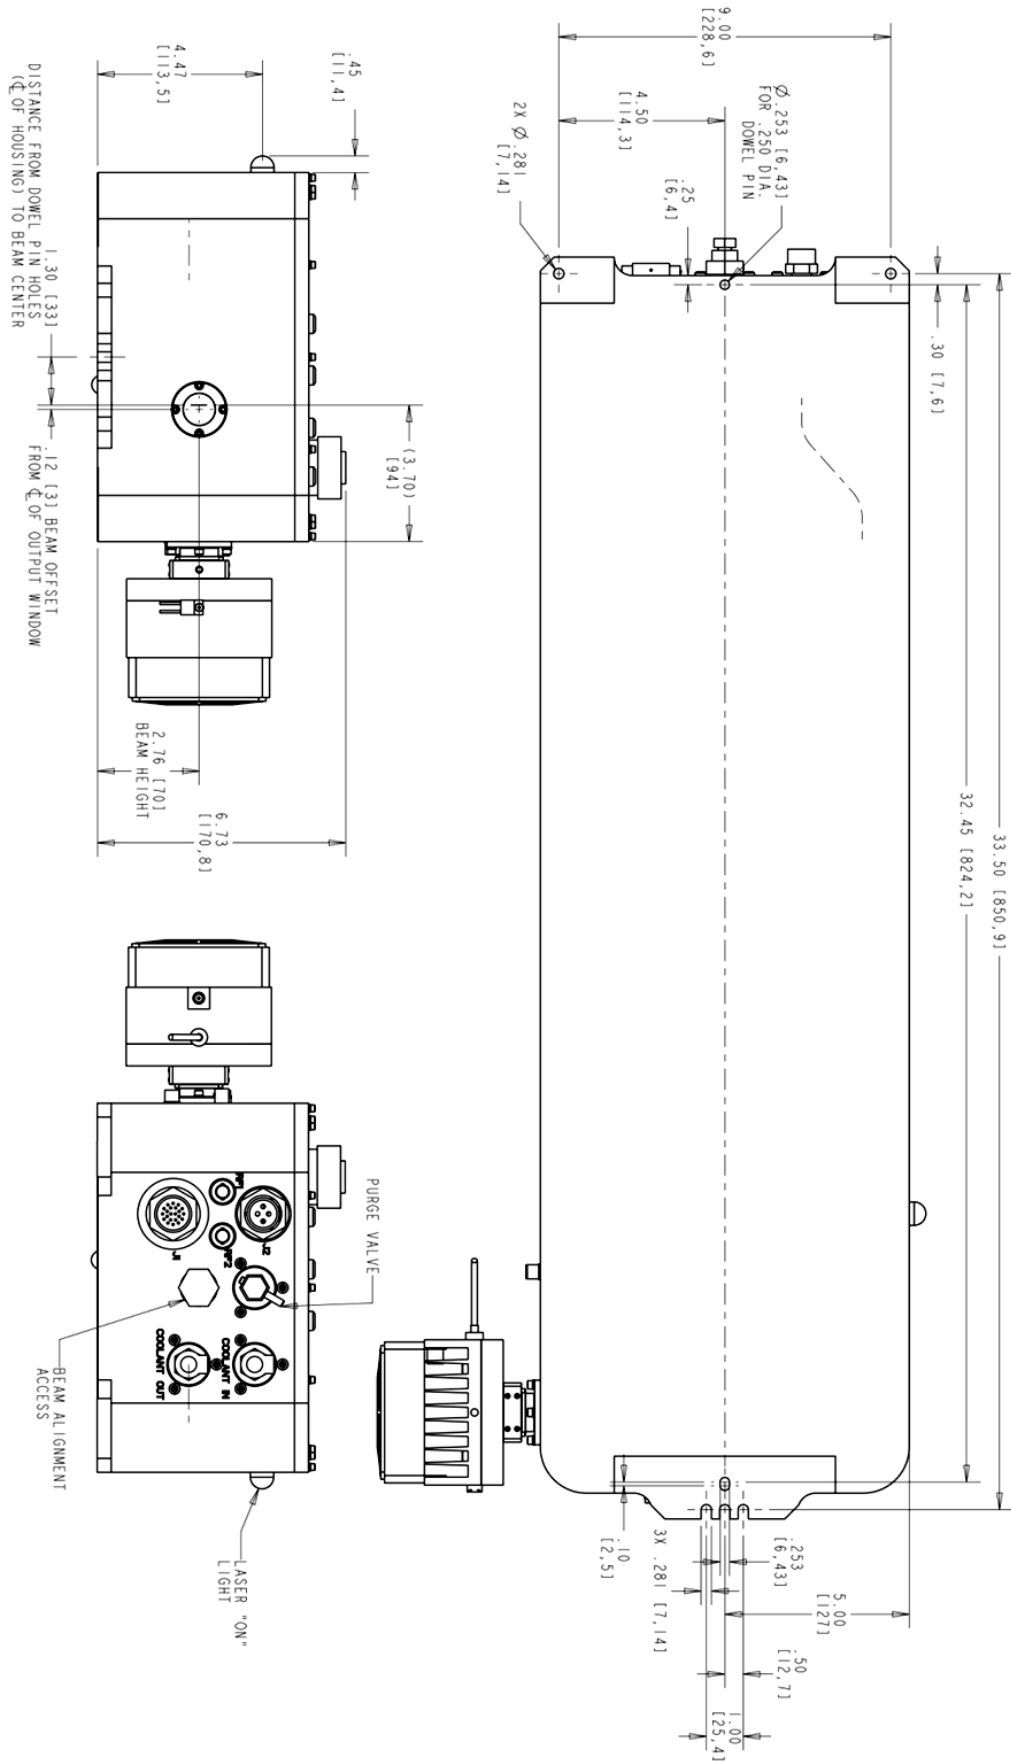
Patara Laser Head Dimensions, Sheet 2
